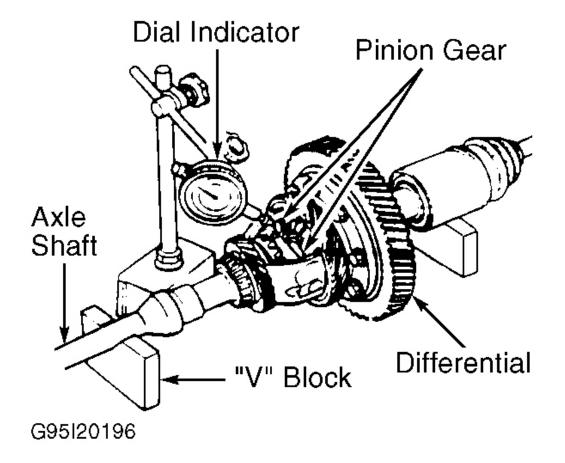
Checking Pinion Gear Backlash Courtesy of MAZDA MOTORS CORP.
